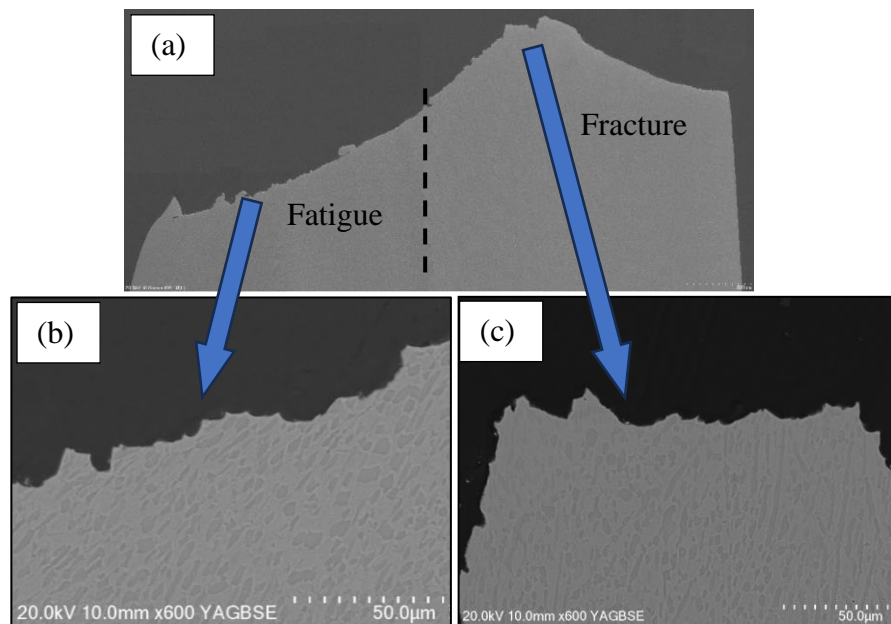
(a) SEM image shows the complete crack path, and back scattered electron image shows (b) the crack path in fatigue crack propagation zone and (c) the crack path in final fracture zone of HCF specimen 4/3 of RFW joint between Ti-64 and Ti-1023, loaded at max. stress 800 MPa.
